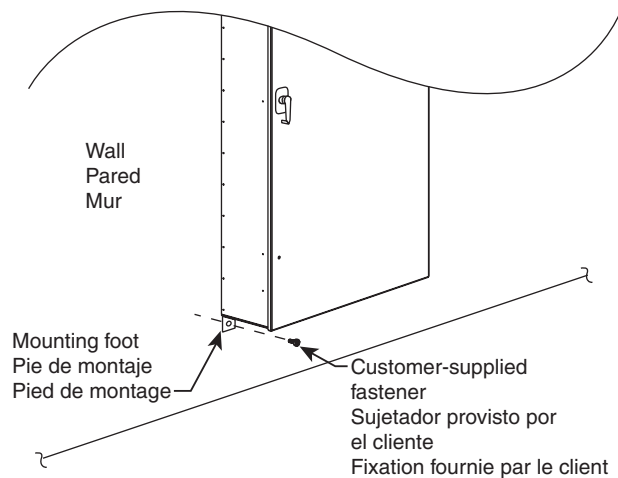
Attaching the Mounting Bracket to the Mounting Surface /
